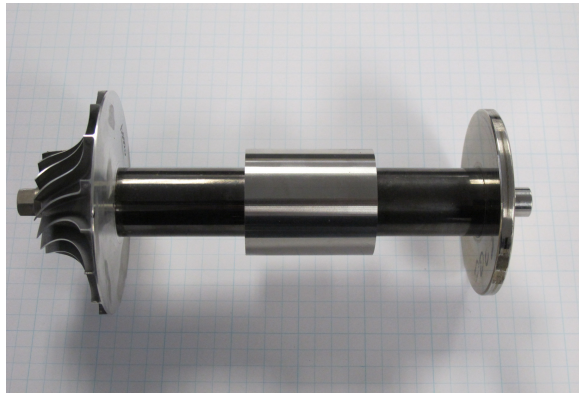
Assembled ESC Rotor System showing impeller (Left), fore/aft bearing journals, PM rotor, and thrust disk (Right).
